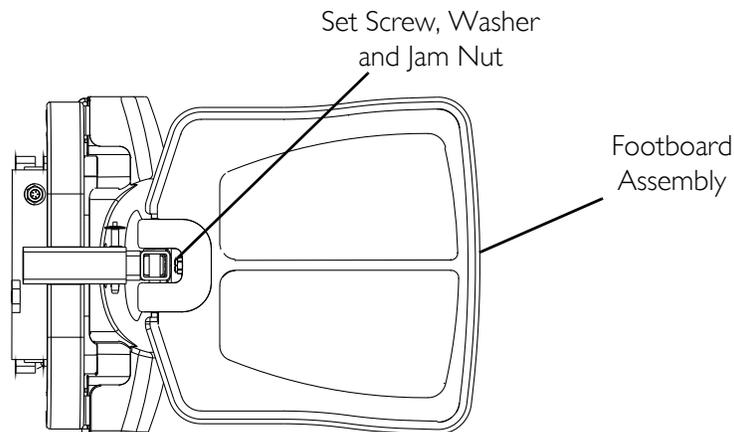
Removing/Installing the Footboard Assembly
